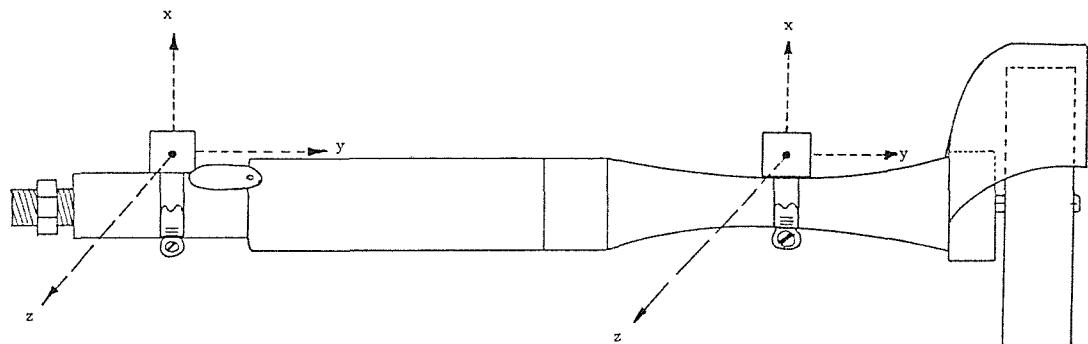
Hose clip accelerometer mount on horizontal grinder for two hand positions
